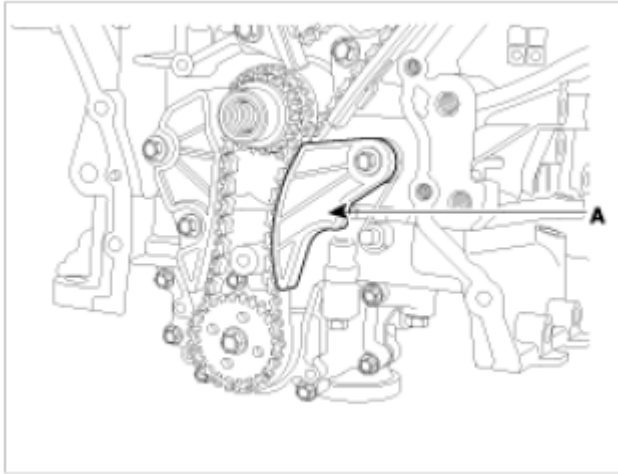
Identifying Oil Pump Chain Tensioner Assembly
